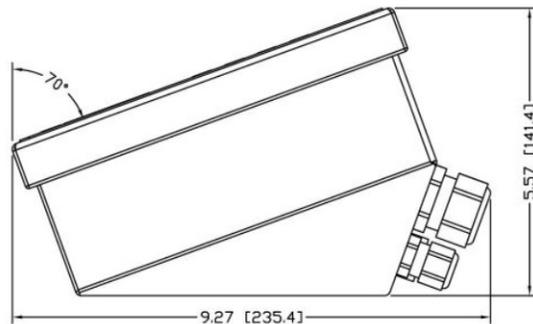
IND780batch Harsh Enclosure Terminal Dimensions, Side
